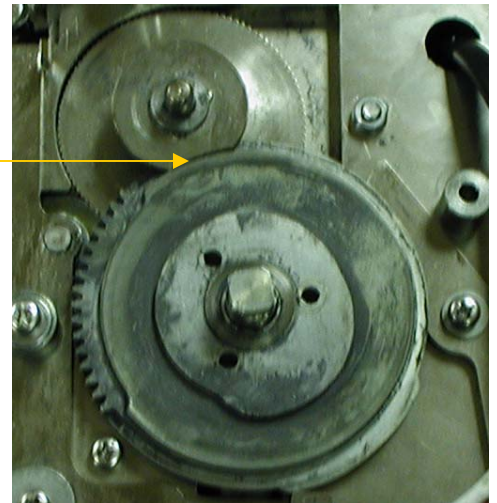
Machine Shown in Position to remove Feed Roller and Segment Gear
